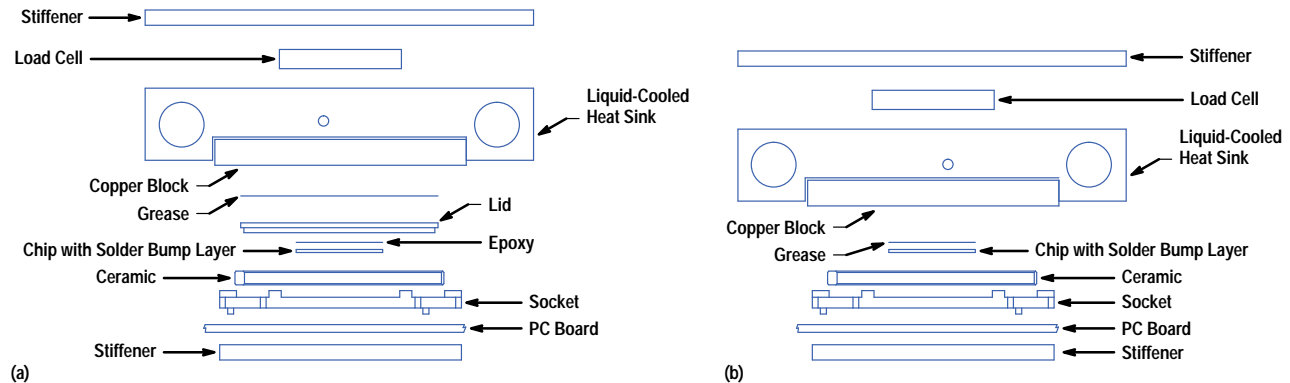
Liquid heat sink assembly. (a) Lidded package. (b) Lidless package.
